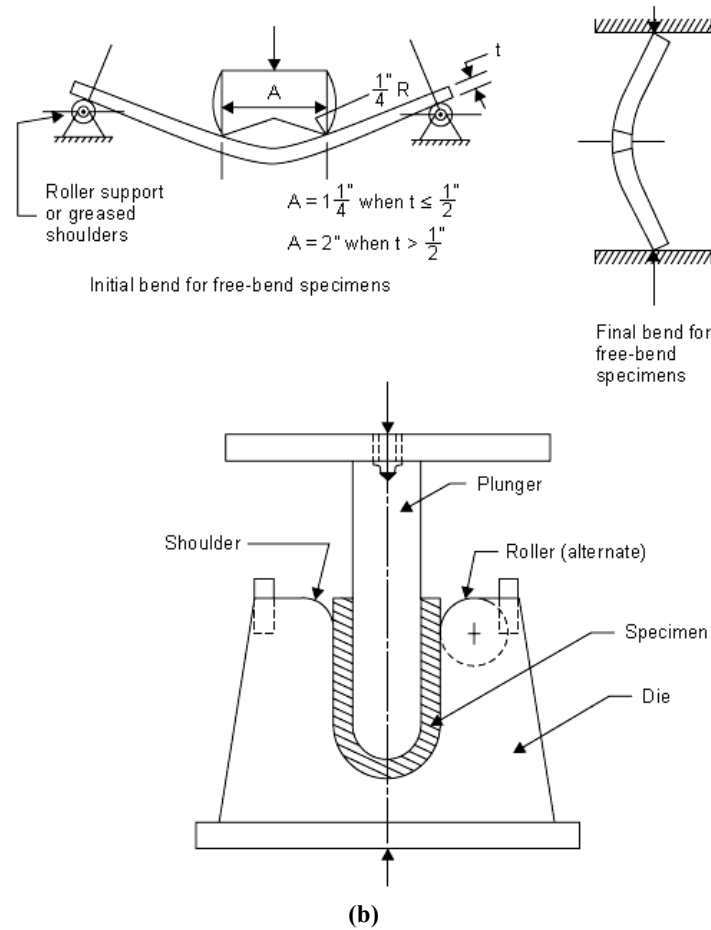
(b) Typical fixtures for free bend testing (top) and guided bend (bottom)
